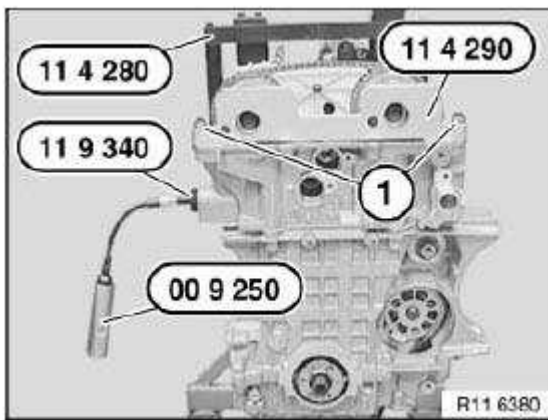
Special Tools (00 9 250), (11 9 340) And (11 4 290)
